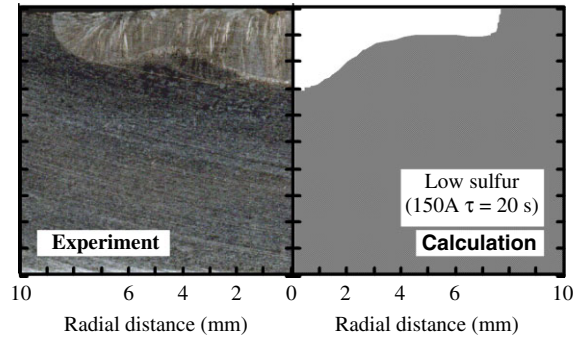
Cross-section of welding bead of a low sulfur stainless steel
